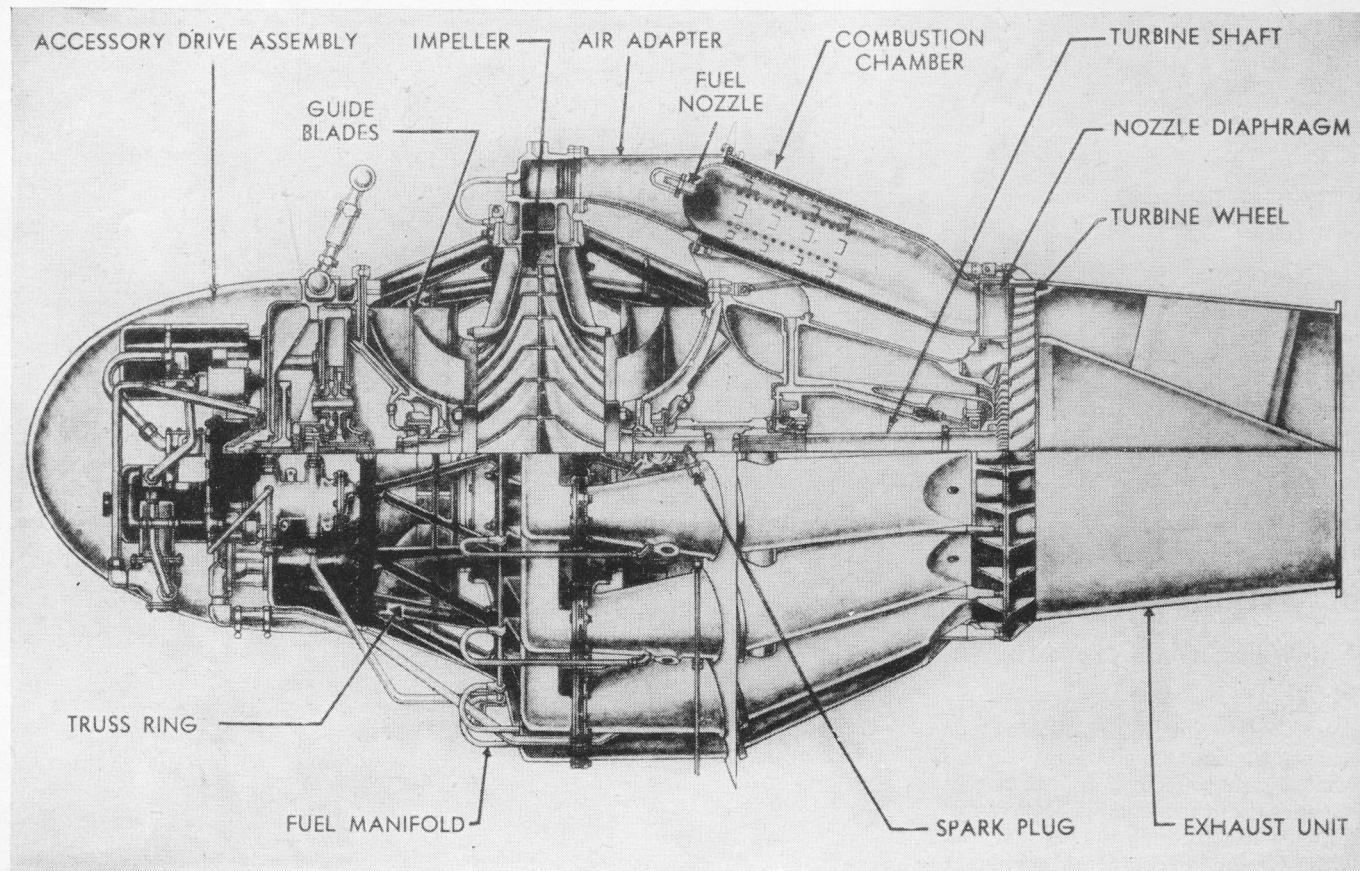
Cutaway drawing of the GE I-40 turbojet.
